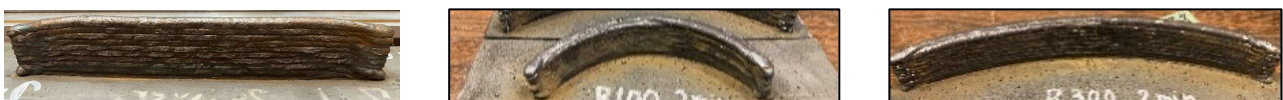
Specimen (left: Straight wall, center: Curve wall ($R = 100 \text{ mm}$), right: Curve wall ($R = 300 \text{ mm}$)).
